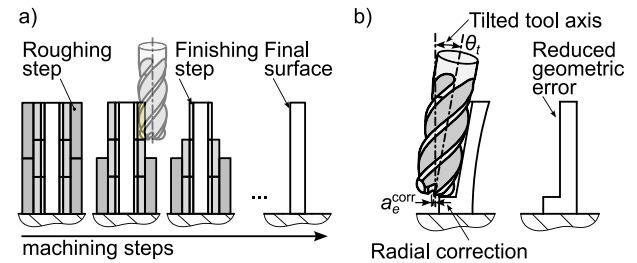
Milling strategies to reduce the geometric error: (a) Multi-step machining to limit workpiece deflection (*waterline milling*); (b) Toolpath adaptation to mirror workpiece deflection.
